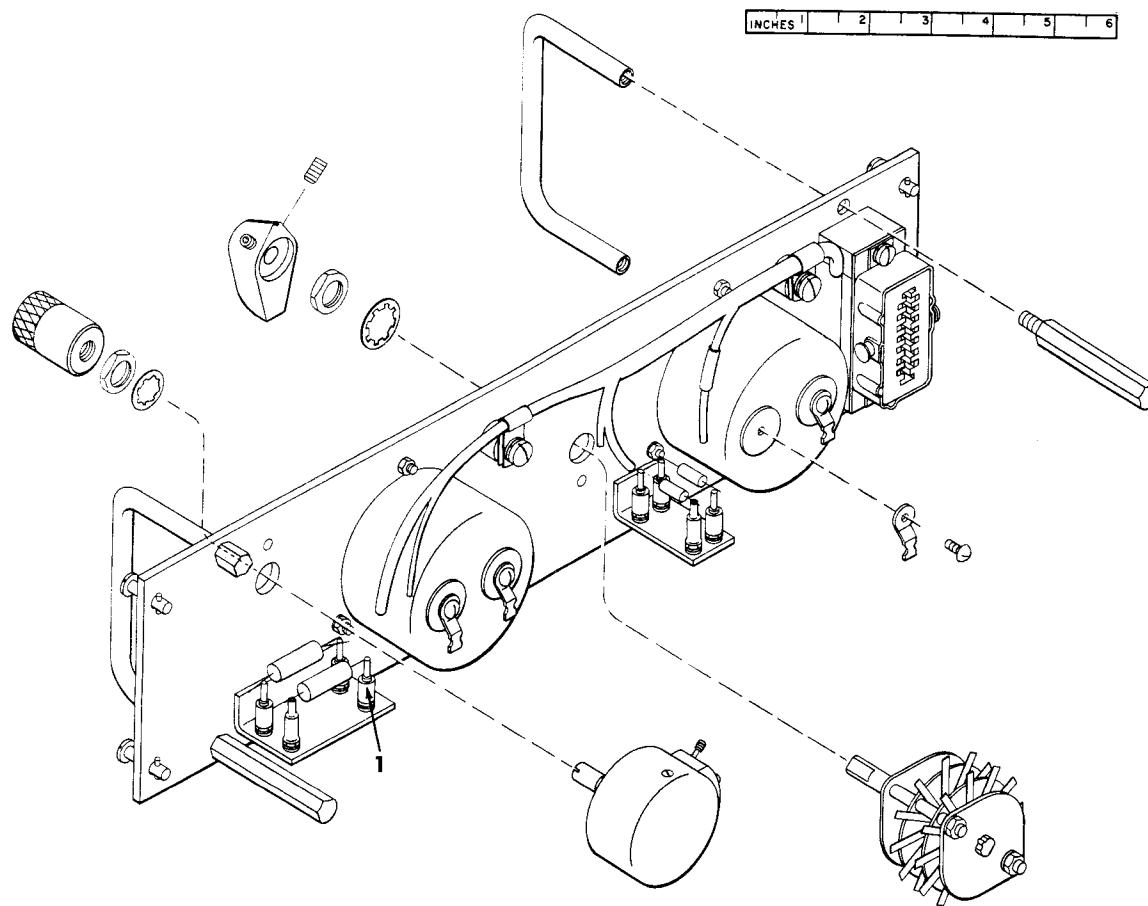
Control, receiver-transmitter (9141310) – partial exploded view
